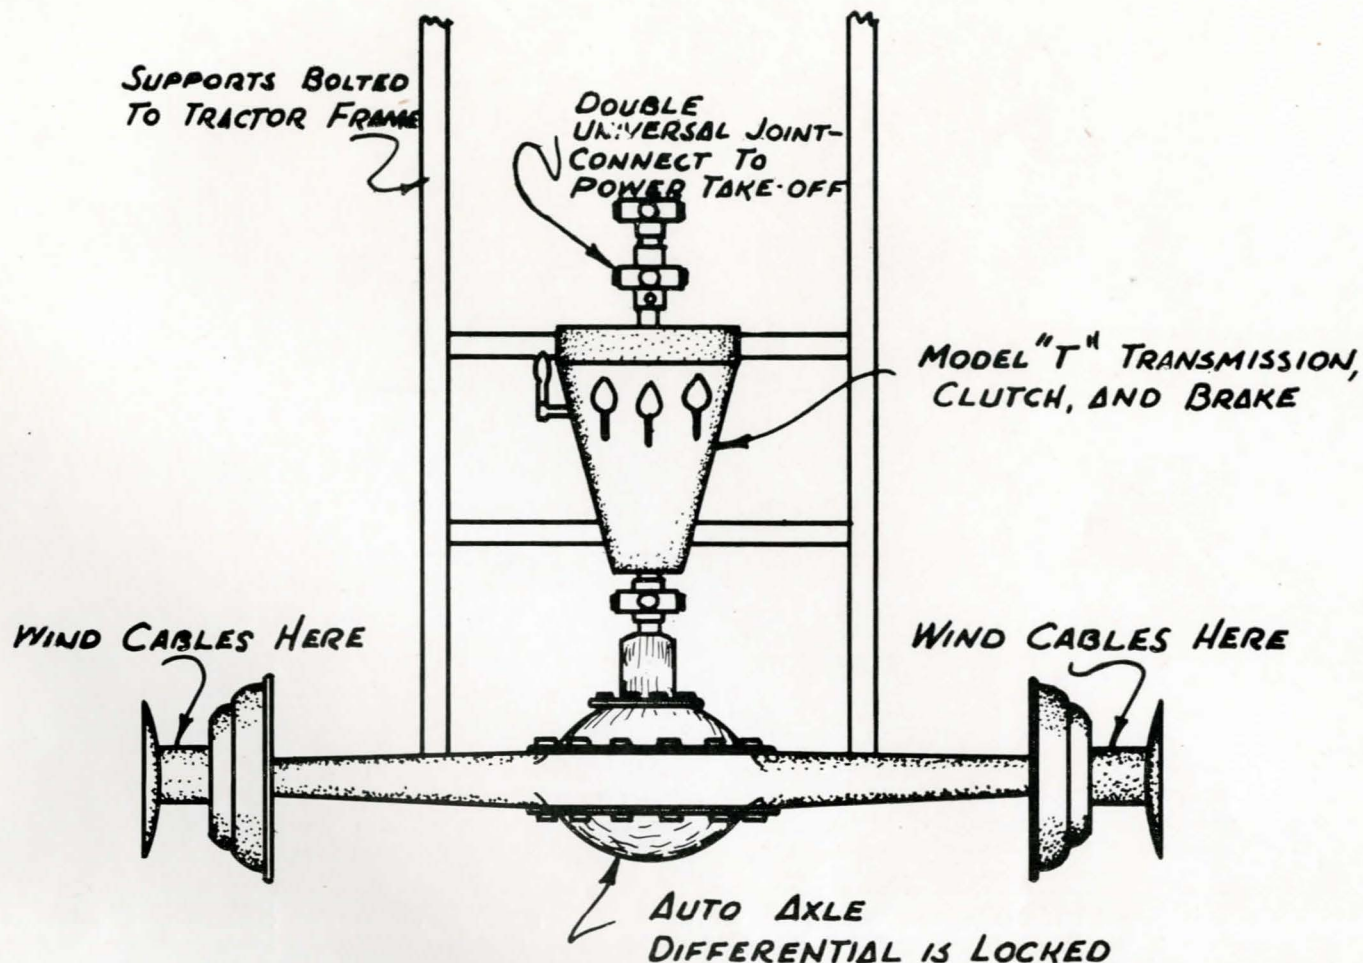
Another type of lift used by some builders which could be used on the loader illustrated in Fig. 1 by using a separate cable on each side of the loader. In this illustration the differential has been locked and a clutch inserted between
